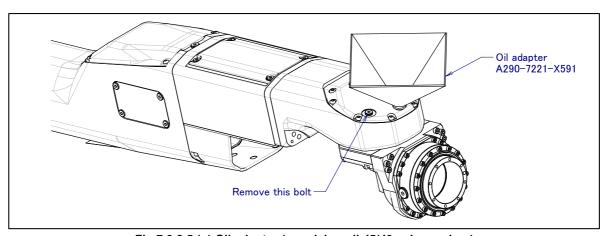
(g) Oil adapter (supplying oil J5/J6-axis gearbox) (ARC Mate 120iC/10L/12L, M-20iA/10L/12L)
